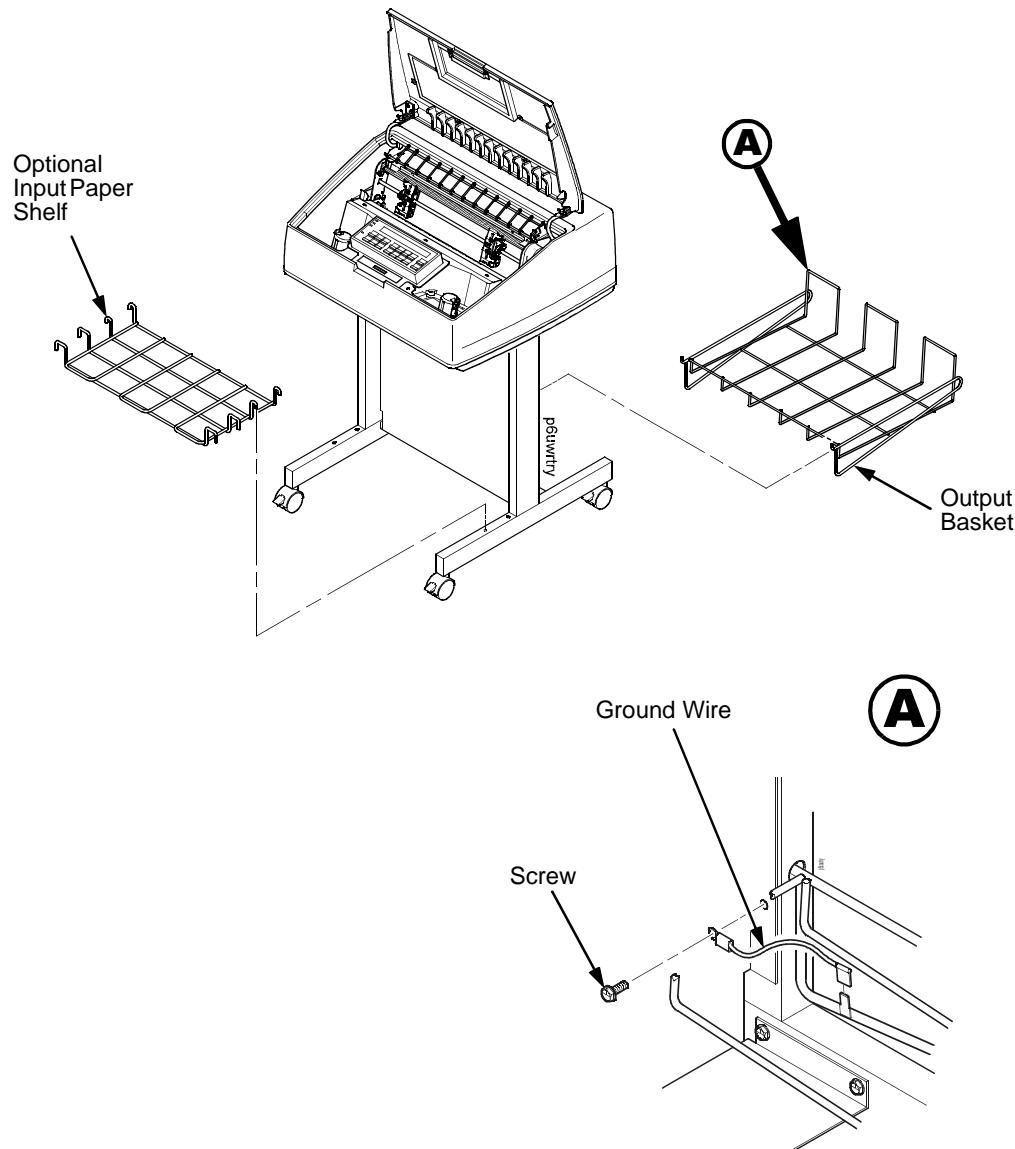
Exploded View of the Pedestal Model Showing Output Basket Attachment
